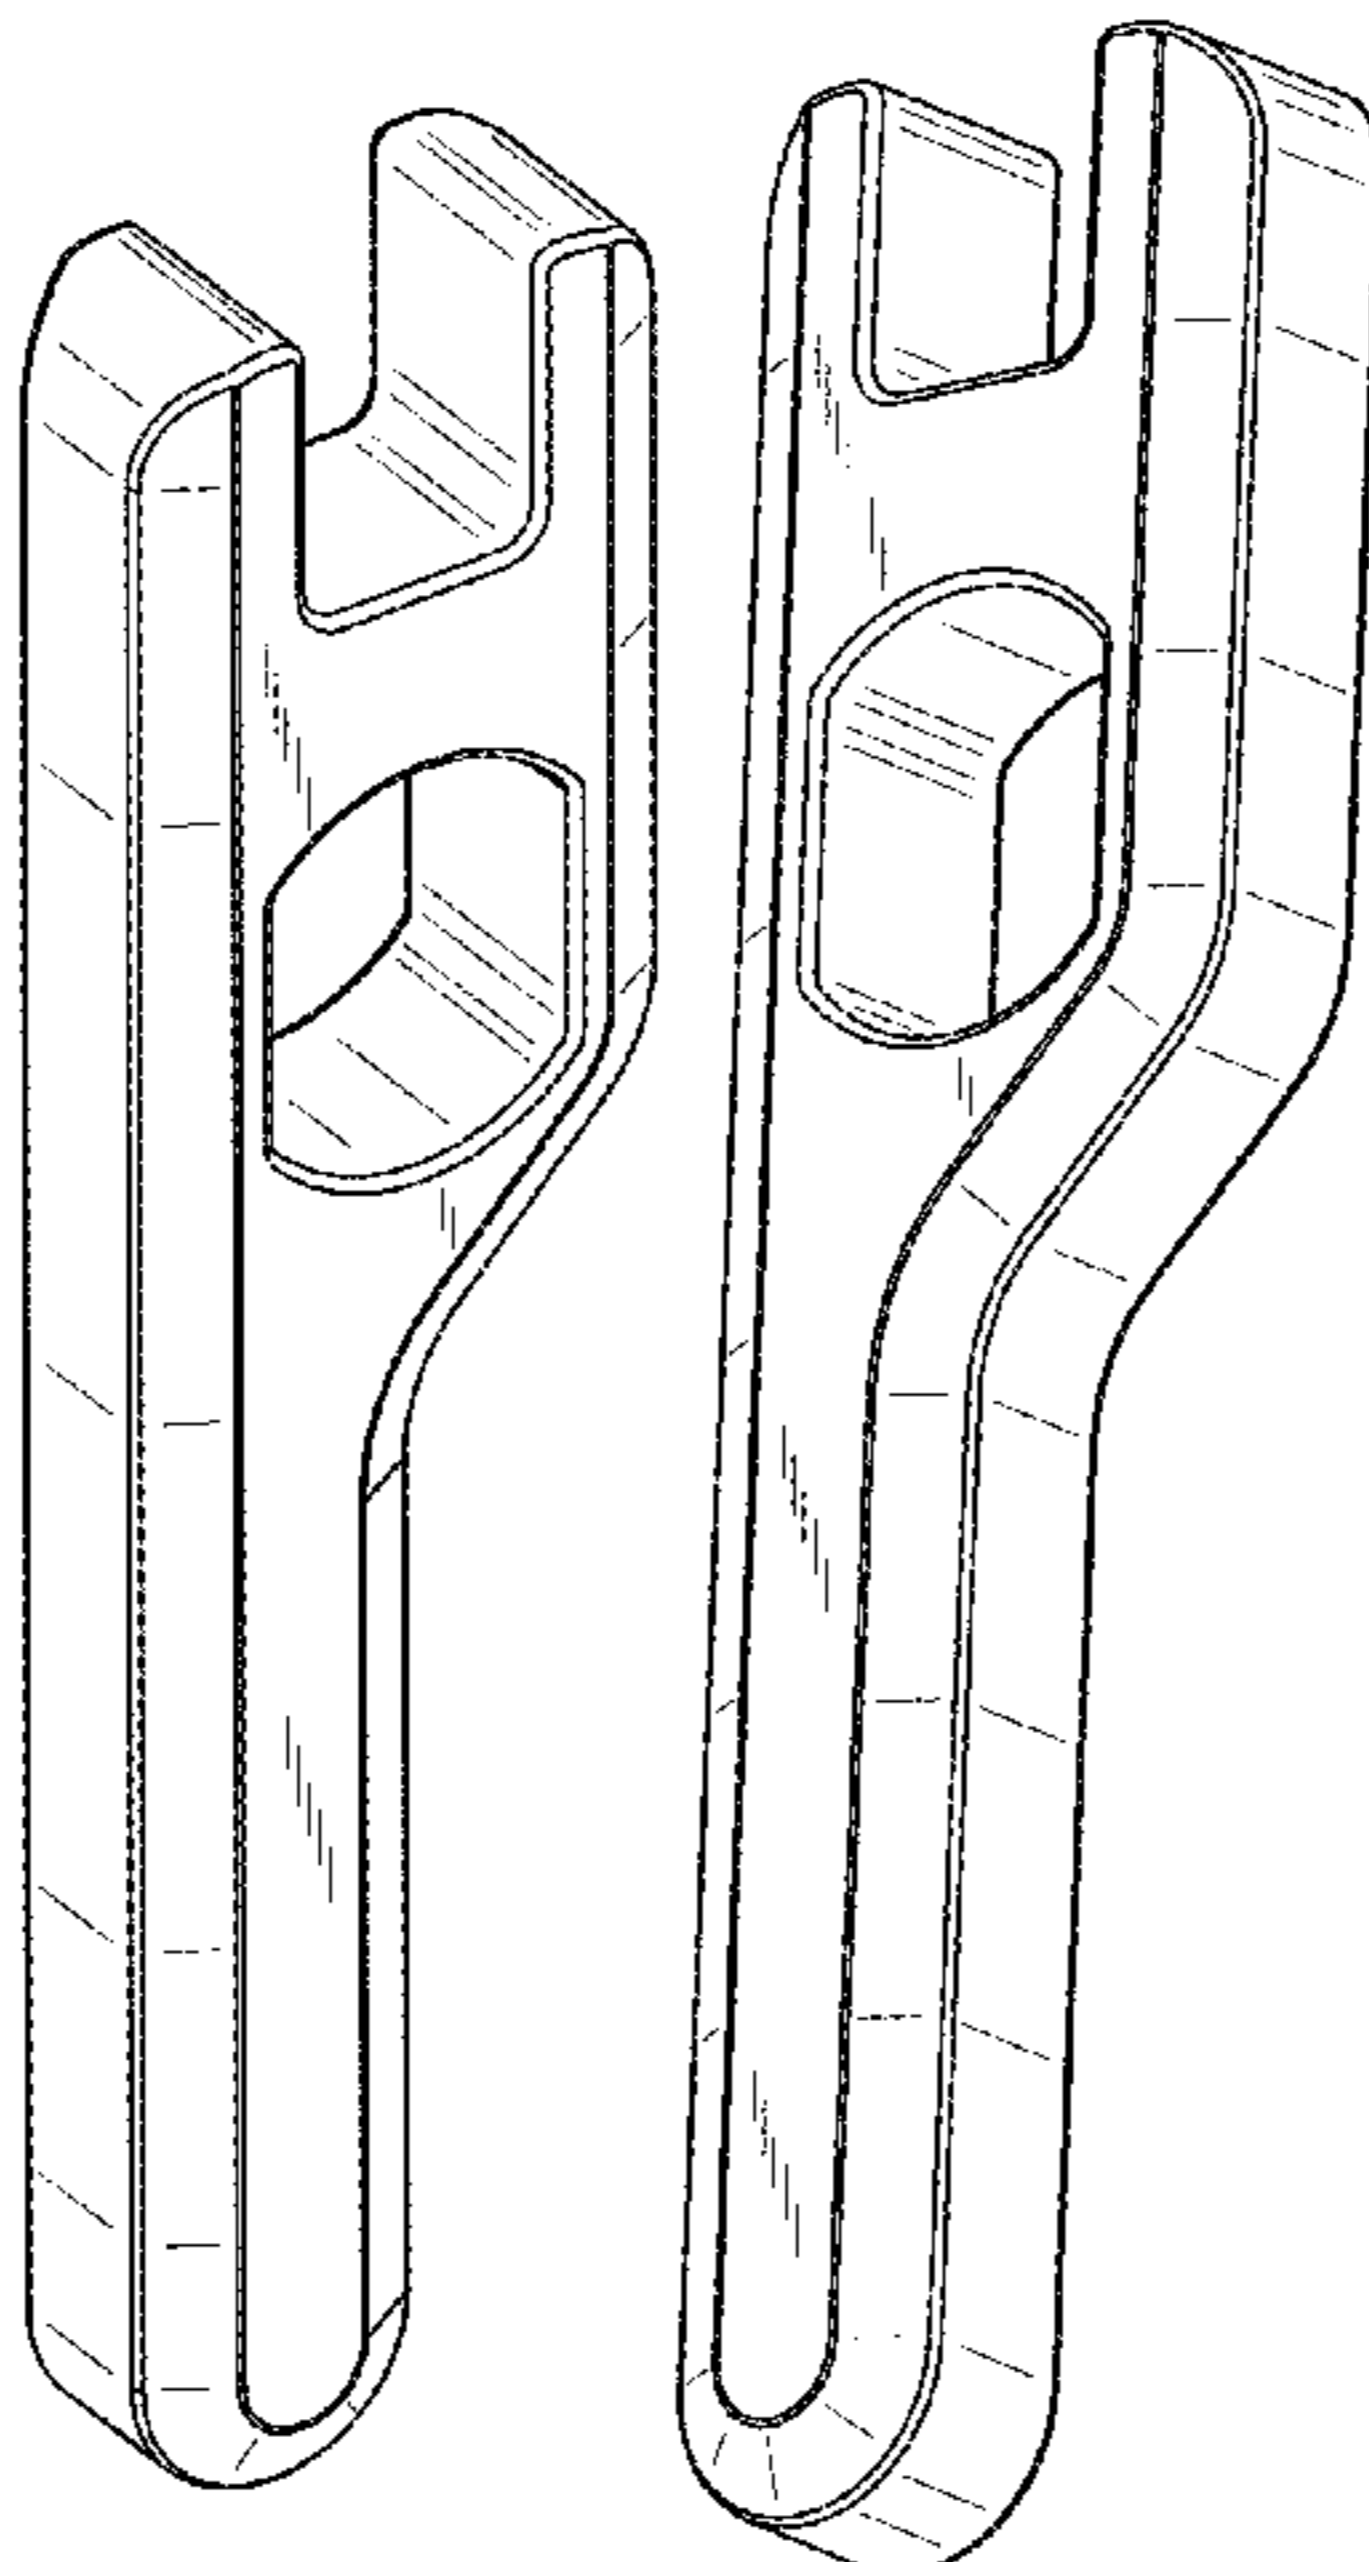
is a front and left-side top perspective view of a multi-tool showing my new design;
